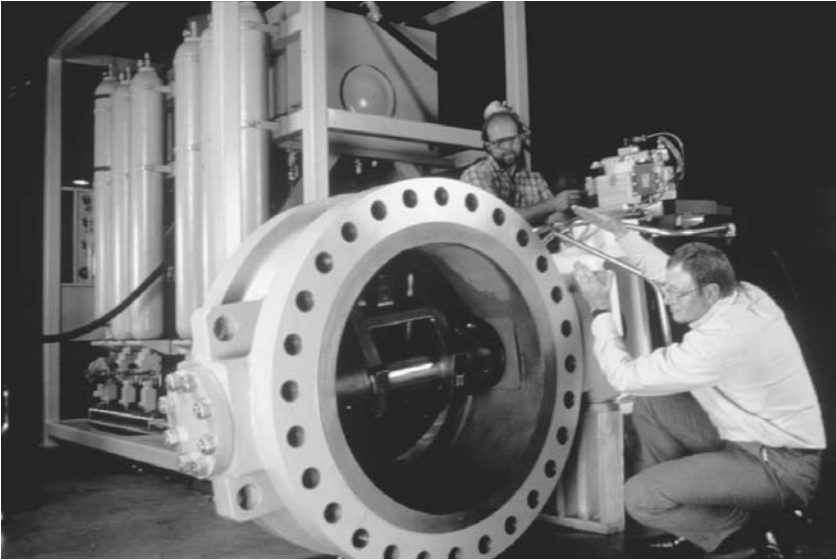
Flanged butterfly control valve. (Courtesy of Valtek International)
